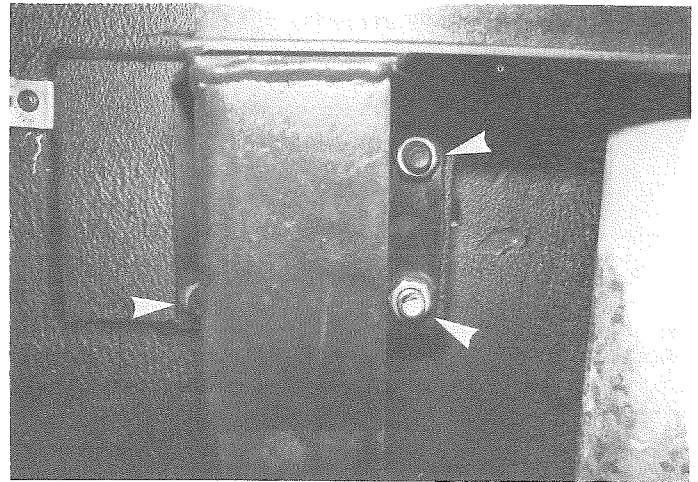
Sub-Frame Mounting Position (3): The third mounting position is located at the extreme end of the sub-frame at the frame rail. Remove three (3) 5/8" diameter bolts on both sides.
